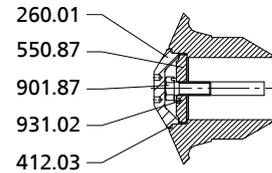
Impeller fastening for bearing brackets S06, S07 and S08, except Sewatec size 500-632
